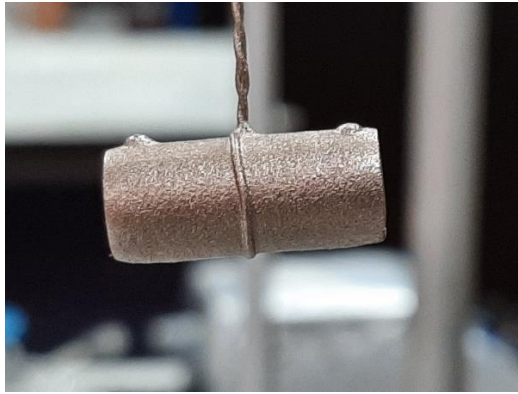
Slanted position and thicker paint deposited at the bottom of the sample
